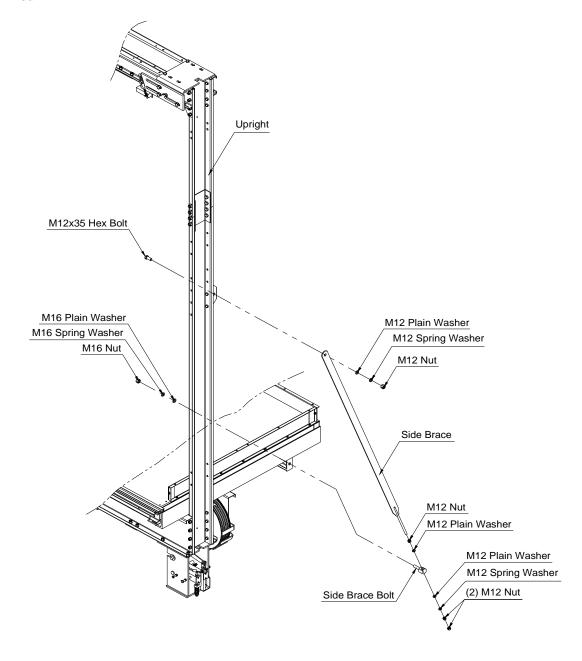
SIDE BRACE INSTALLATION (Underslung Fork type)
